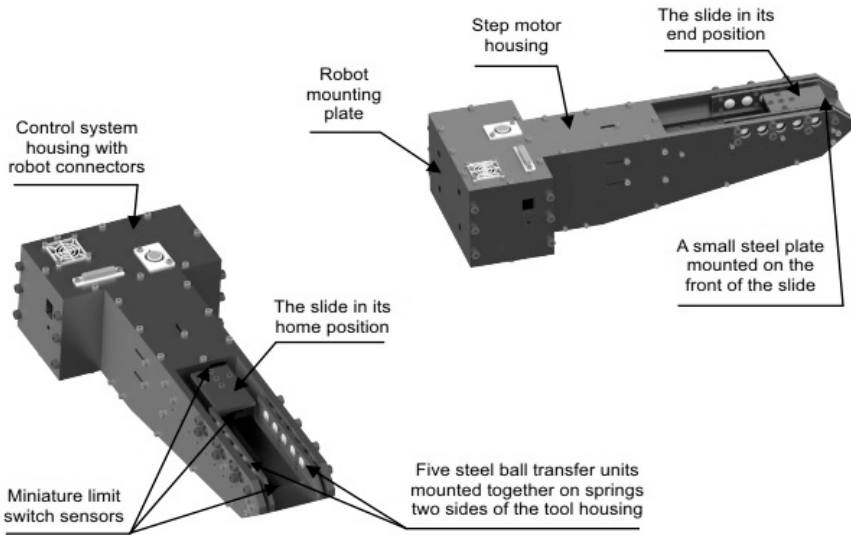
Tool for automated magnetization purposes [Paper VIII]
